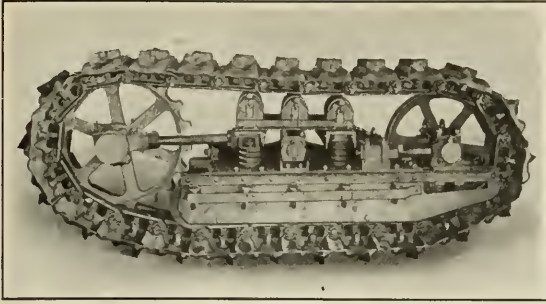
Track Assembly of 75-horsepower Holt Caterpillar Tractor
